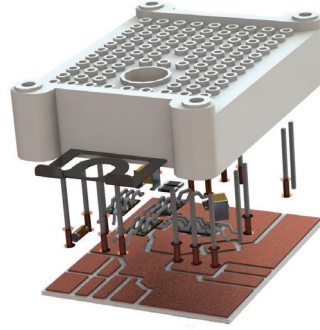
Three dimensional Solid-Works rendering of power module.
